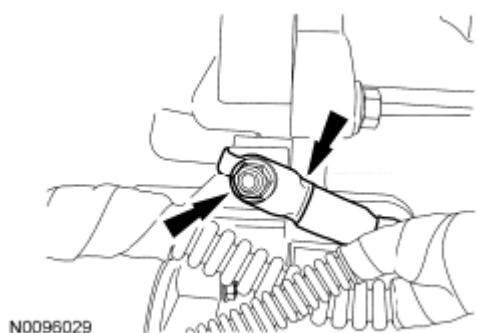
Locating Nut & Starter Motor Stud Bolt
